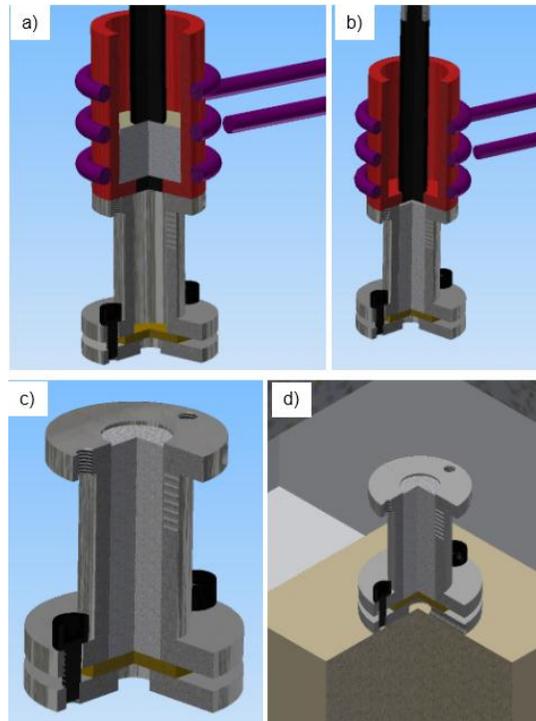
Schematic of new H13 mold set up for testing a flat material coupon: a) induction melting of Al alloy; b) bottom pouring by lifting the stopper rod; c) removing the lower portion of the apparatus and d) placing inside the resistance furnace preheated at 700 °C.
